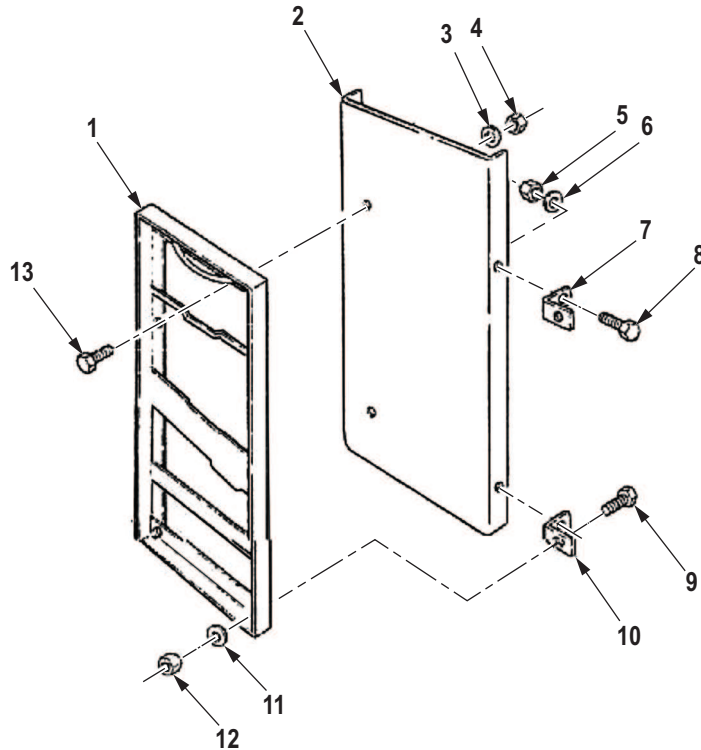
Pioneer Tool Kit Mounting Bracket Installation.
